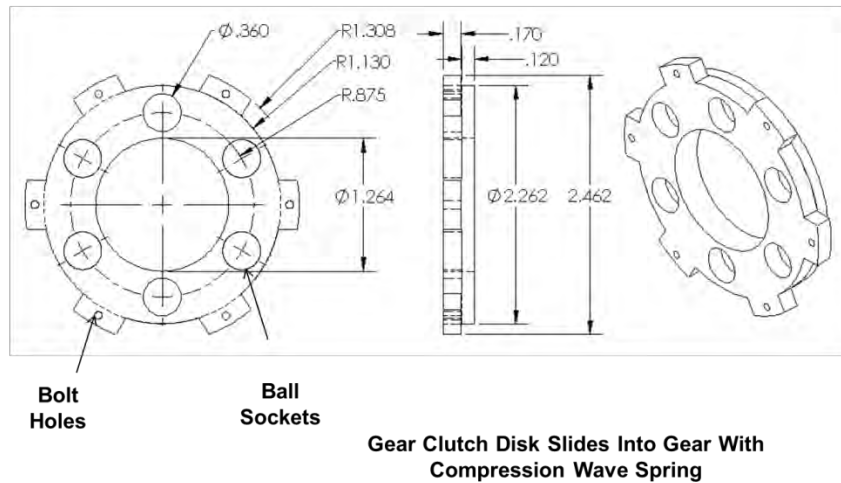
Gear Clutch Disk Holds Ball Sockets
